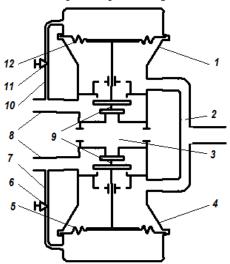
Scheme of the developed block of pulsators of the milking machine and general view: 1, 4 – chambers of constant vacuum pressure; 2 – vacuum inlet; 3 – chamber of constant atmospheric pressure; 5, 12 – membrane; 6, 11 – throttle holes; 7, 10 – controlled channel; 8 – controlled pressure outlets; 9 – blocks of control valves
